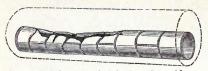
Explosion of a Cornish-boiler from collapse of furnacetube, from corrosion due to bad feed-water.
